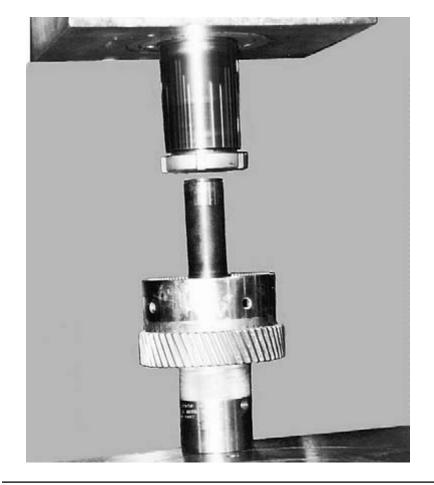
Pressing Clutch Shaft Into Transfer Gear
